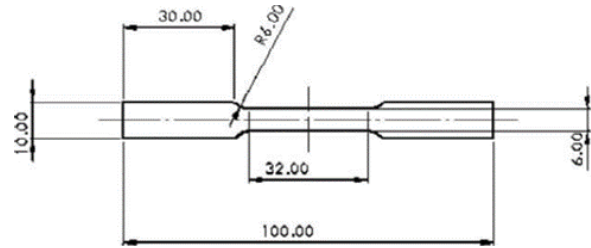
ASTM E8 Standard Tensile Specimen [8]
